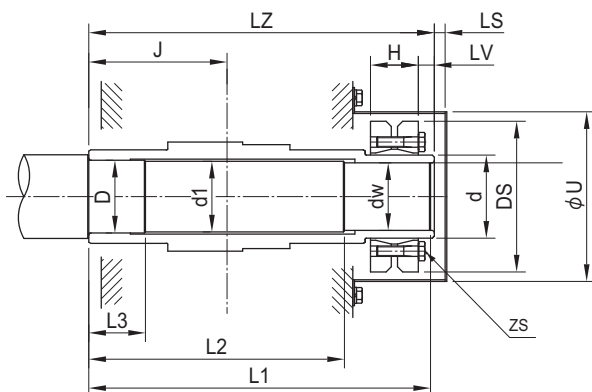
Hollow Shaft Dimensions for Shrink Disk mounting
